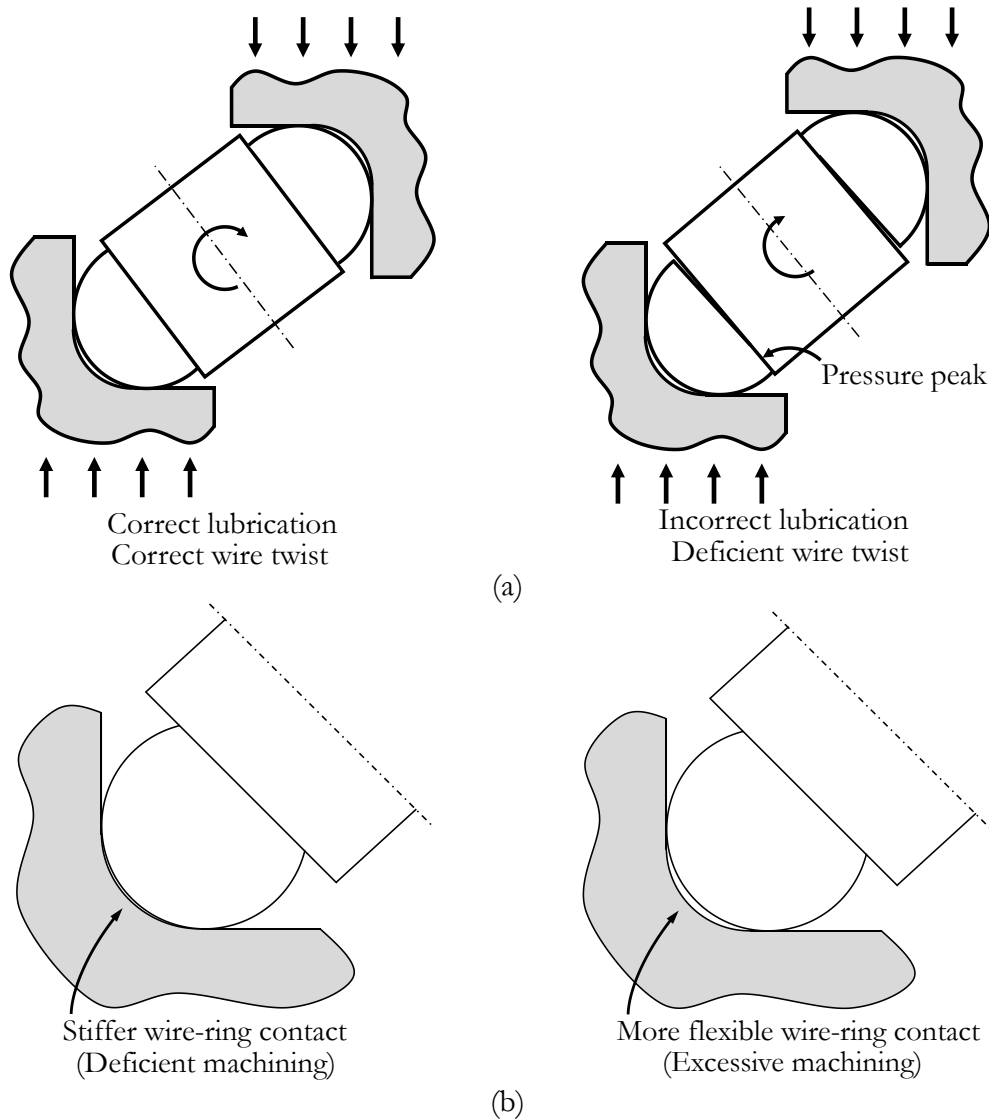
Effect on the bearing stiffness: (a) Correct wire-ring lubrication; (b) Correct ring machining.
